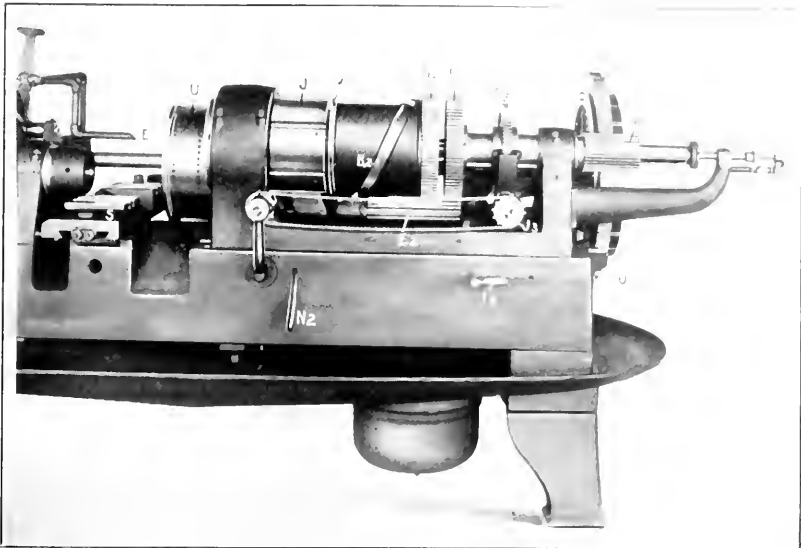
Turret End of 3¼-inch Cleveland Automatic Screw Machine
